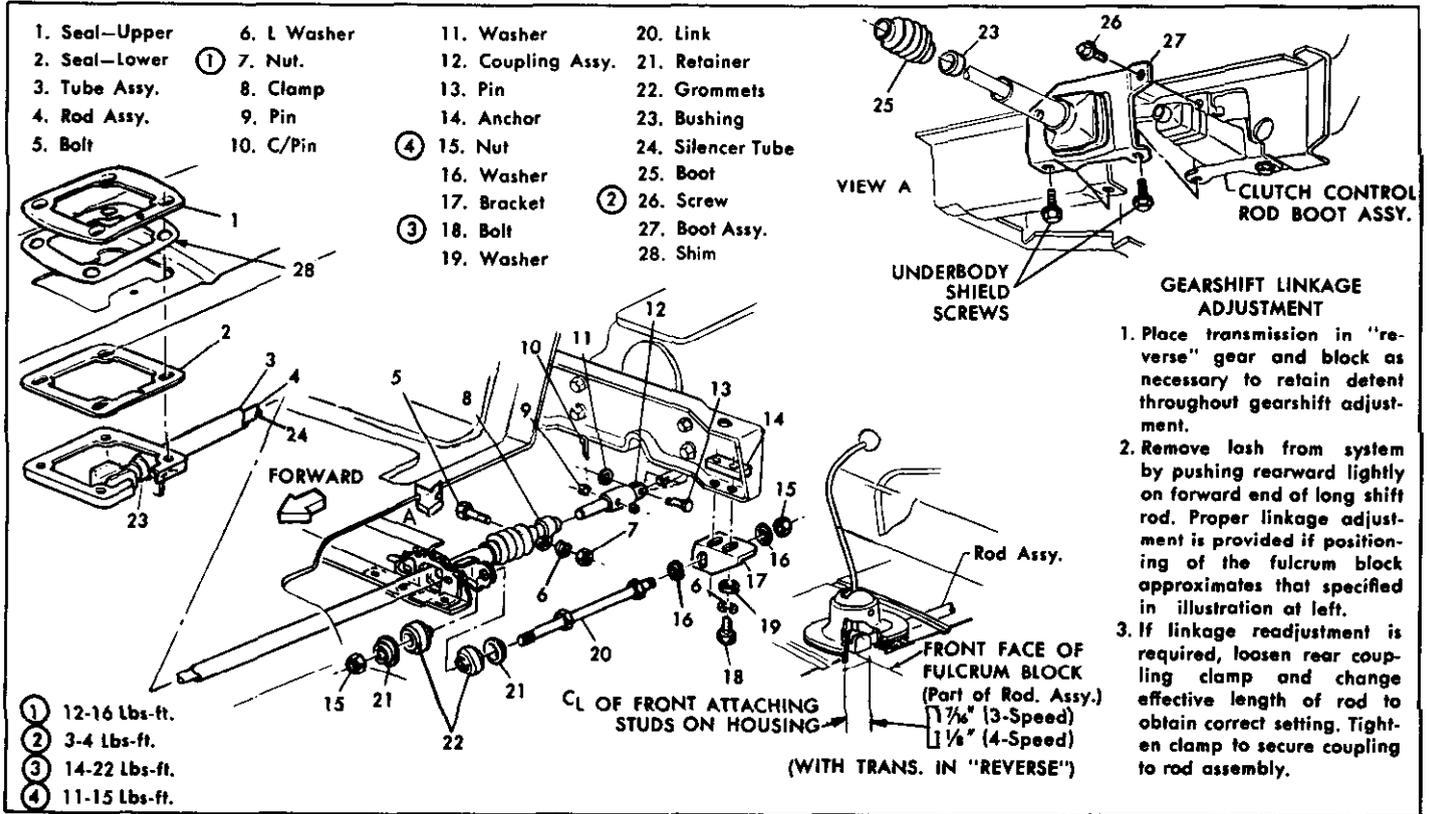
A-3 & 4-Speed Shift Linkage Installation & Adjustment
